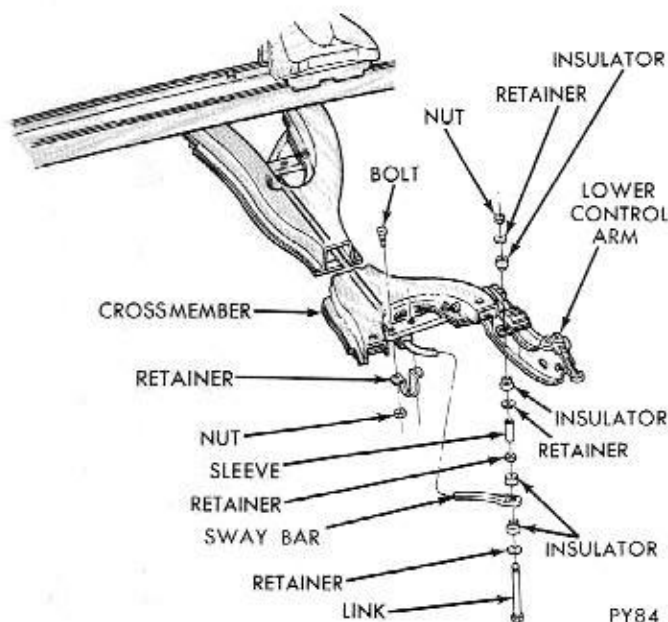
Sway Bar Assembly (Coronet-Charger)
